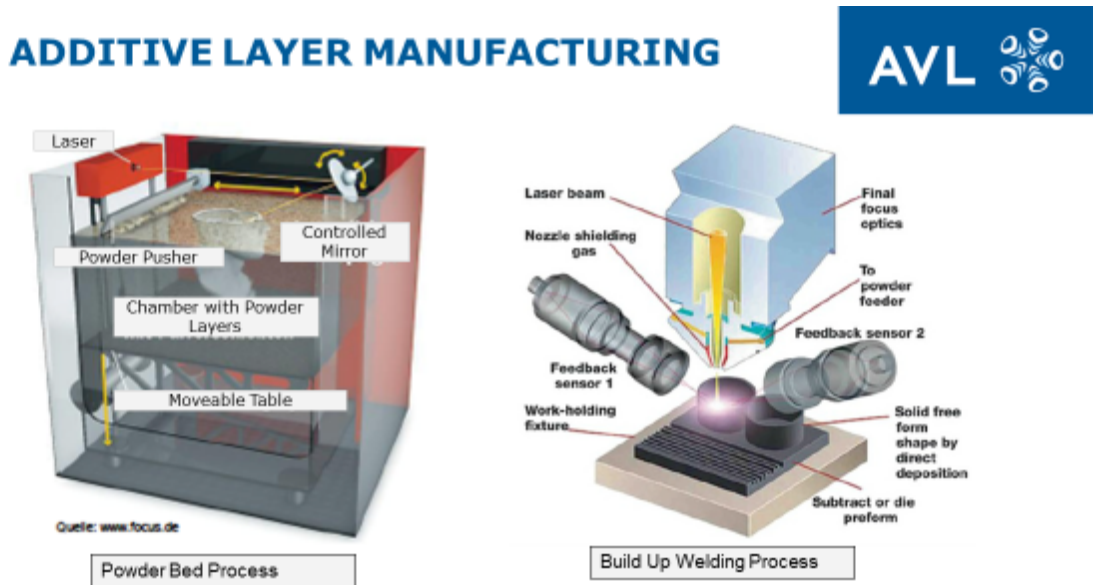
Additive Manufacturing – Powder-Bed am Build-Up Welding Process [56][37]
